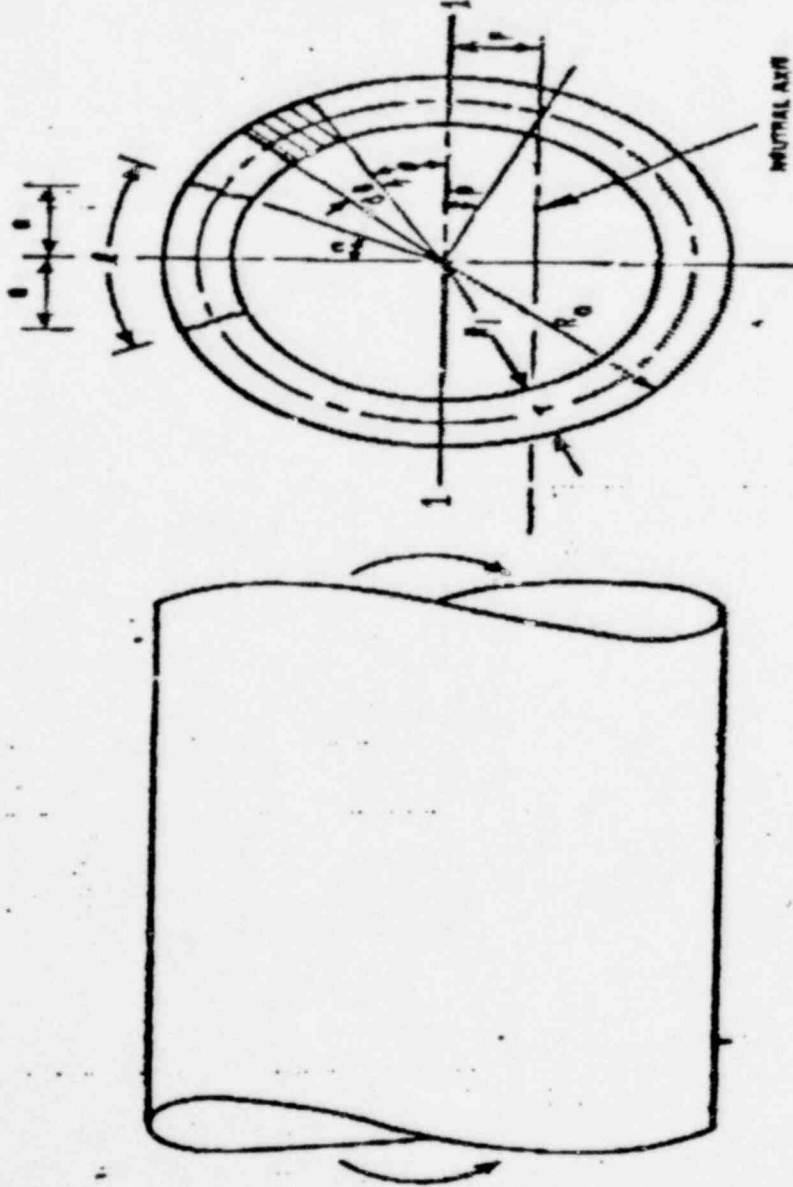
Pipe With a Through-Wall Crack in Bending
